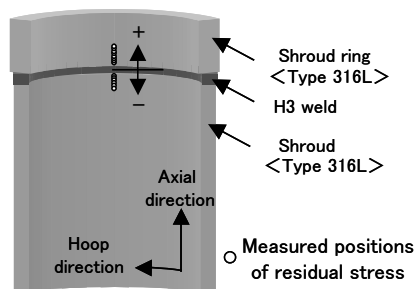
Positions of residual stress measurement on shroud component (H3 weld line) after WJP in manufacturing factory.
